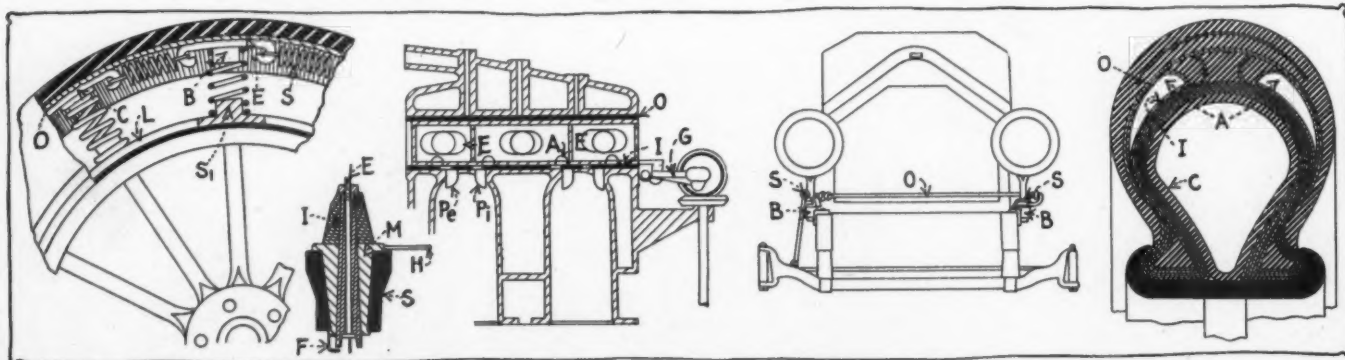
Casey spring tire. Fig. 2—Blake spark-plug. Fig. 3—Adams motor valve. Fig. 4—Krimmel movable headlight support. Fig. 5—Stewart & Harlan tire construction.
